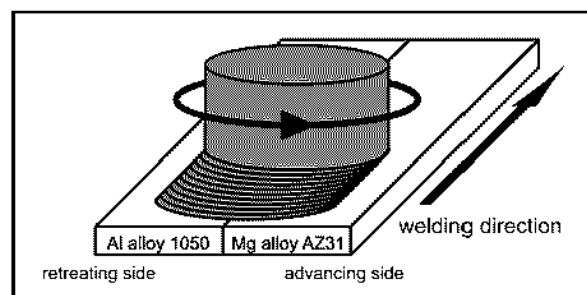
Schematic illustration of dissimilar friction stir welding.
